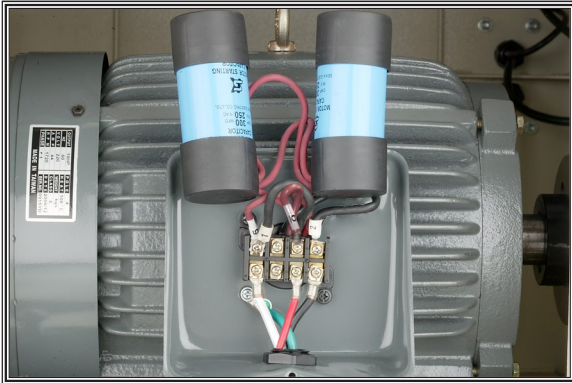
W1772 sanding drum motor wiring and start capacitors.
